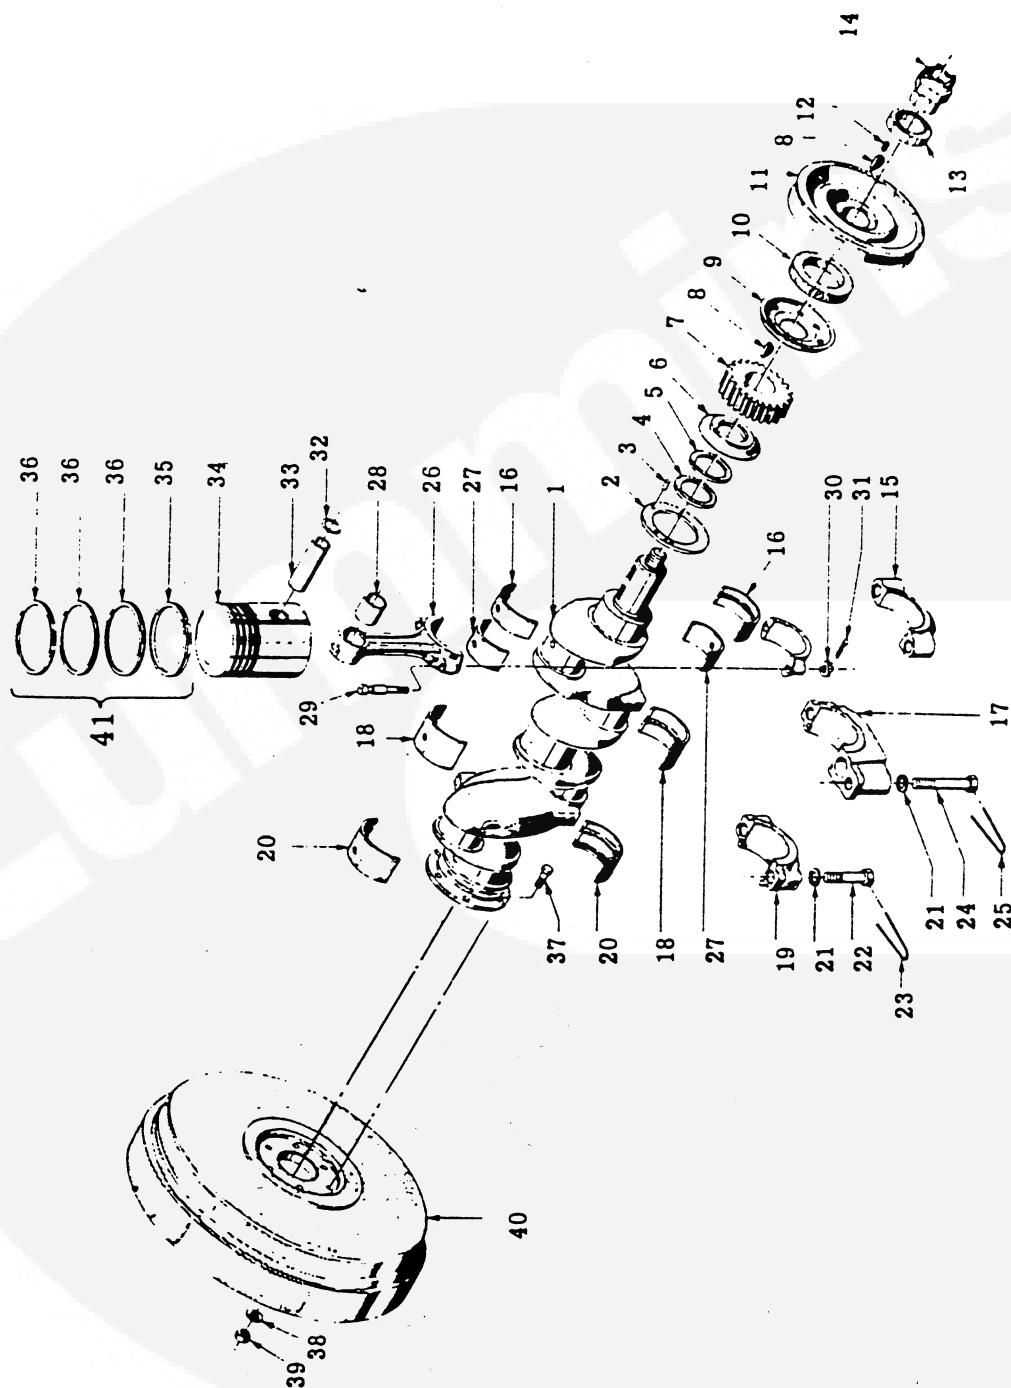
INTERNAL VIEW ENGINE PARTS GROUP
